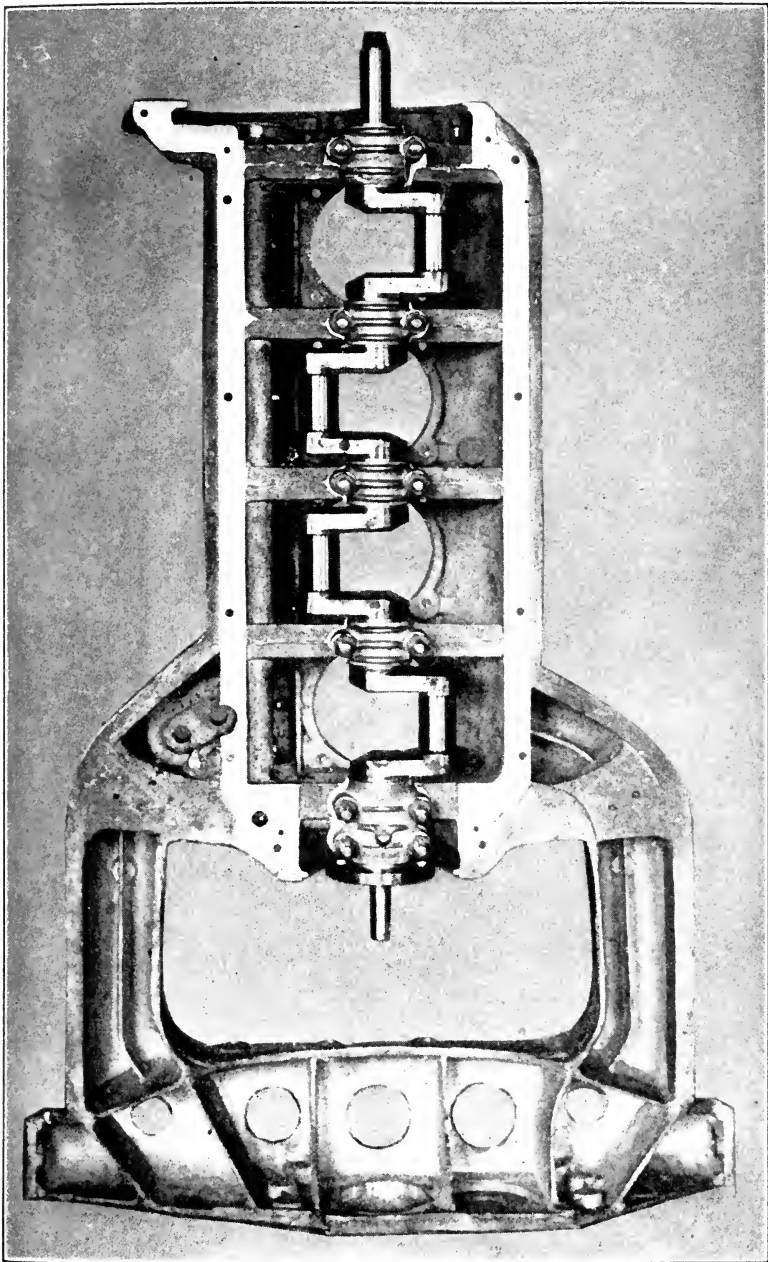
Top Half of Knox Crank Case. Note Method of Supporting Five-Bearing Crank Shaft and Substantial Yoke-Encircling Space for Fly Wheel and Serving to Hold Transmission Gearing to Form Unit Power Plant.
